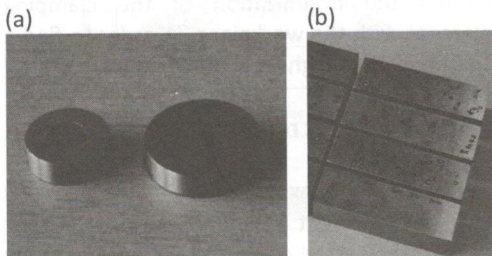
Photo images: (a) clamping/locating elements, and (b) workpiece material specimens
